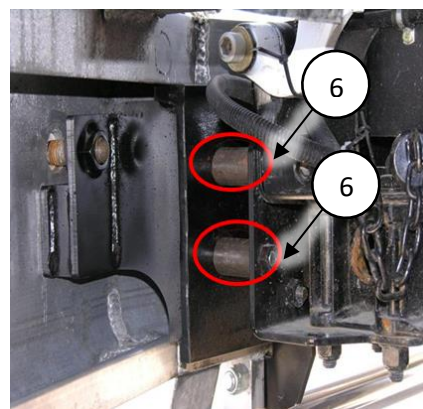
Bracket Installation Side View (PB 365 & PB 367)
